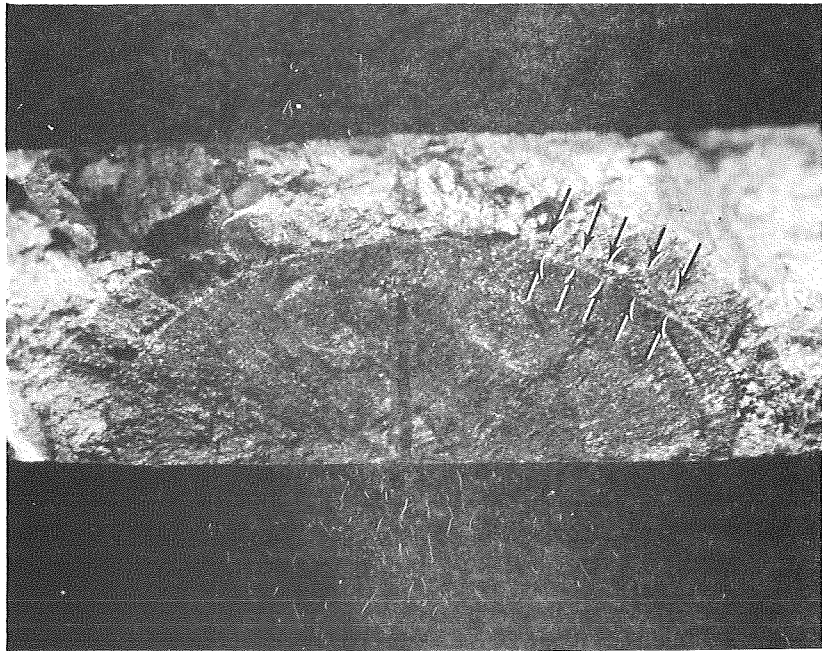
Fracture Face of Specimen Showing Nonuniform Flaw Growth in Weld Centerline (specimen 9W3-3; 0.090-inch; water)
